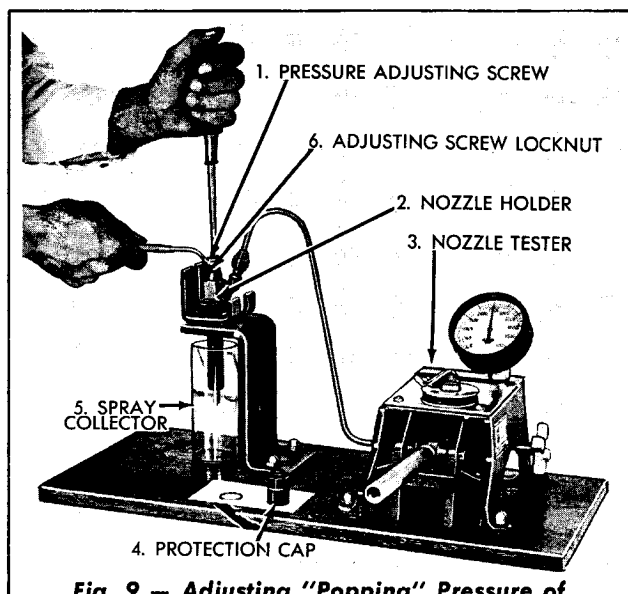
Adjusting "Popping" Pressure of Nozzle-Holder
